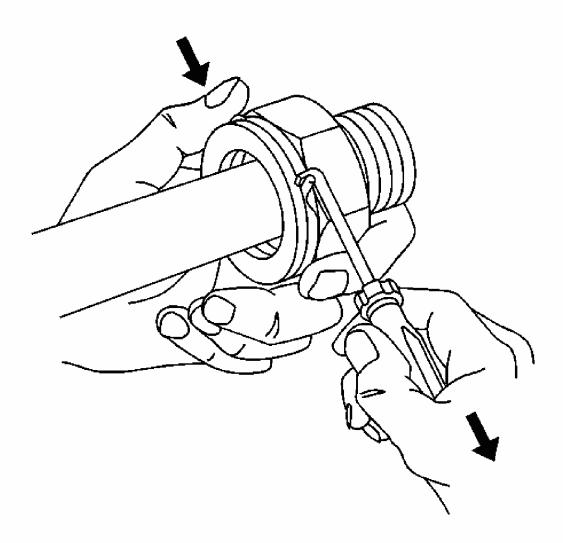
Removing Internal Spring Clips Courtesy of GENERAL MOTORS CORP.
